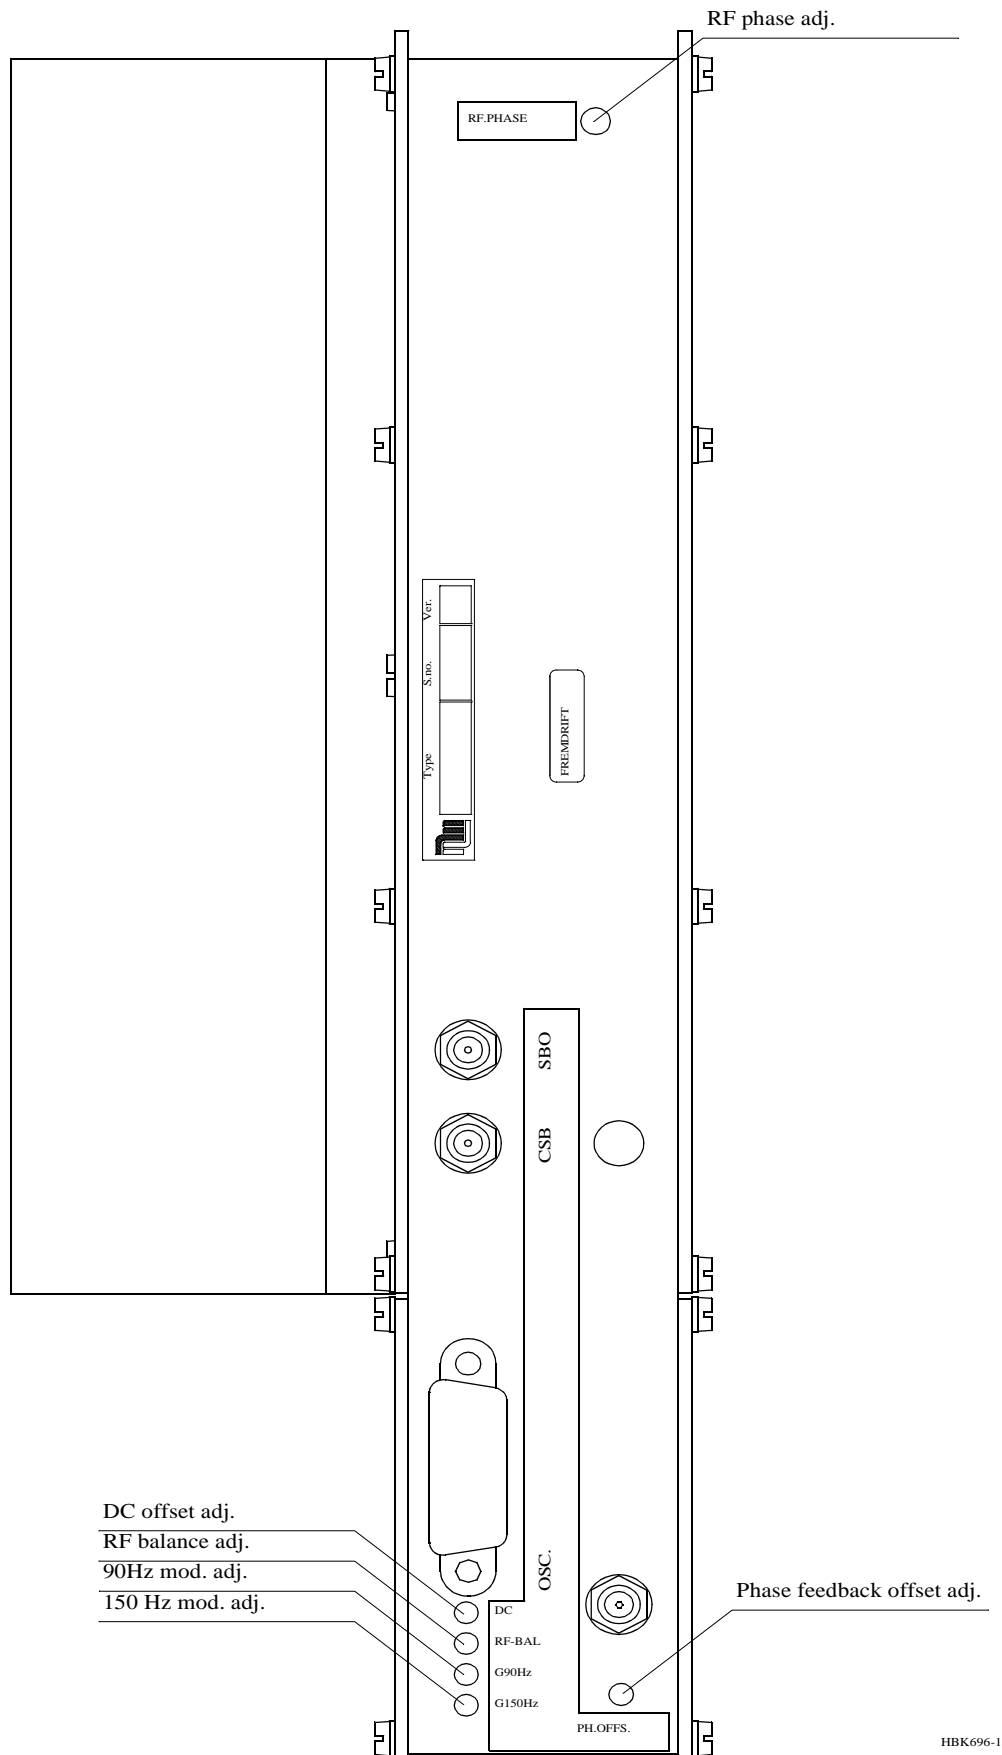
Power Amplifier Assembly adjustment points (rear view).
